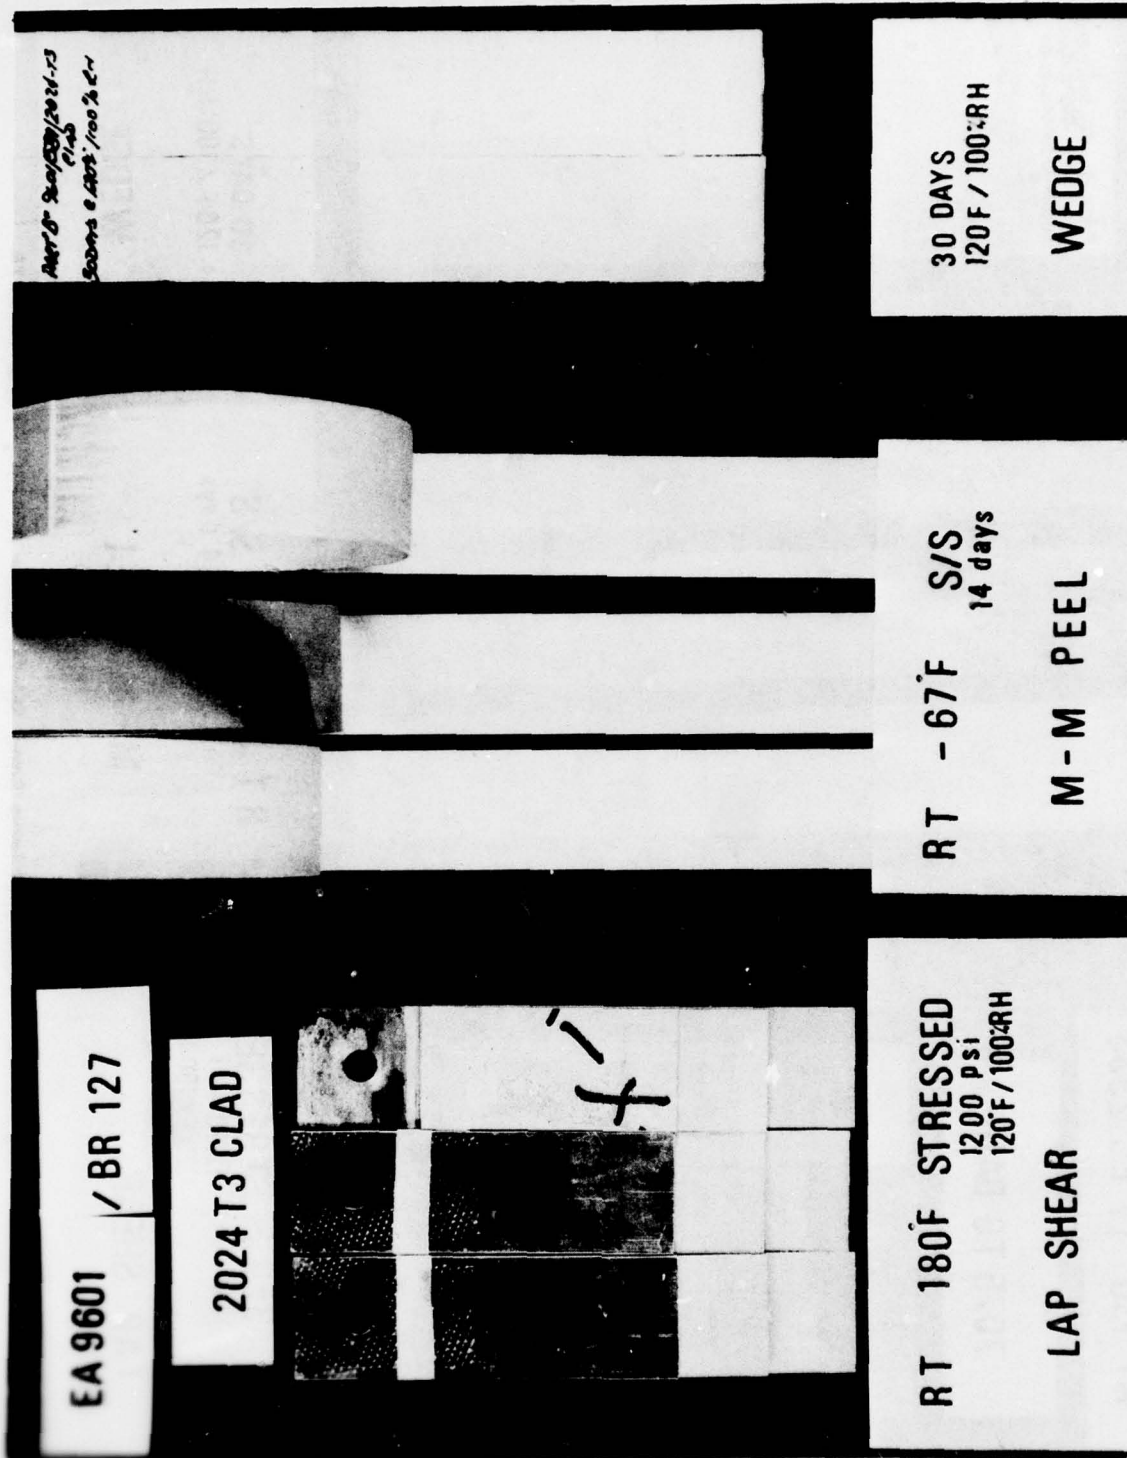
Specimen Bond Surfaces -- EA 9601, 2024-T3 Clad
